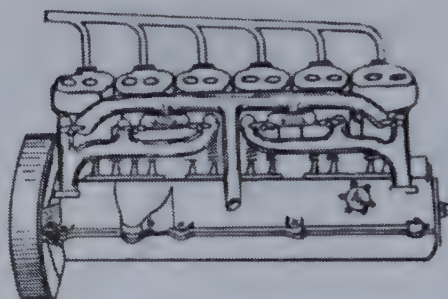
A Six Cylinder, Vertical, water cooled Gasoline Engine. Cylinders cast singly.
